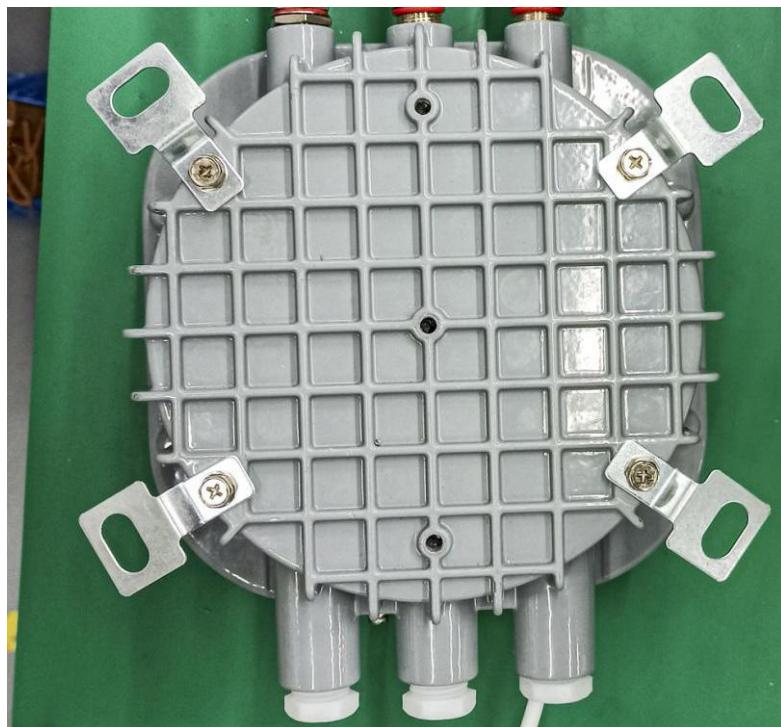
Screw gasket spined in the opposite side of the default setting
